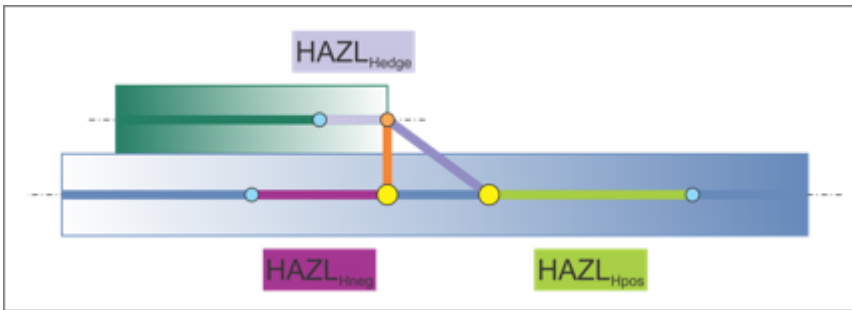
Vertical and Angled L Weld HAZ
